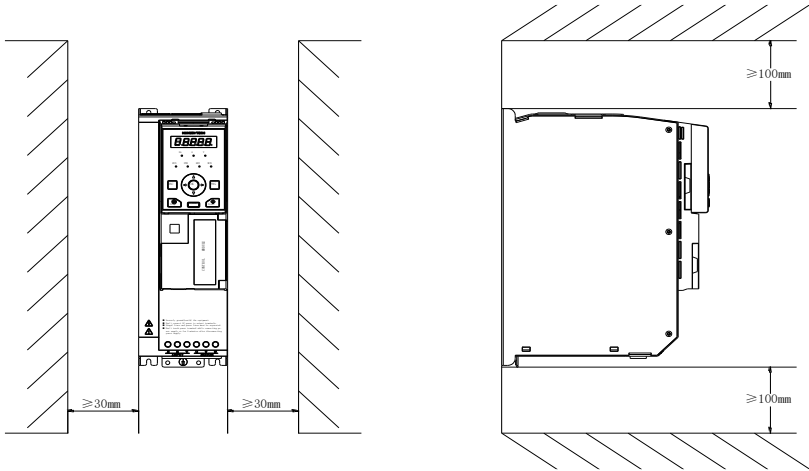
Installation direction and spacing requirement for IMD153U43E and below power ratings
